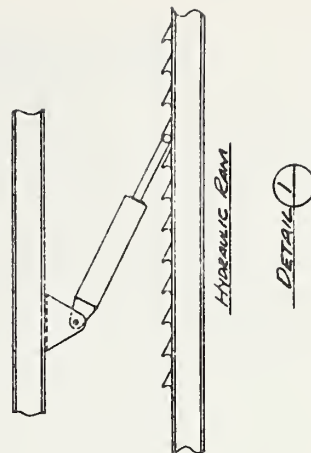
Conceptual Design for Improved Drill Rod Handling
